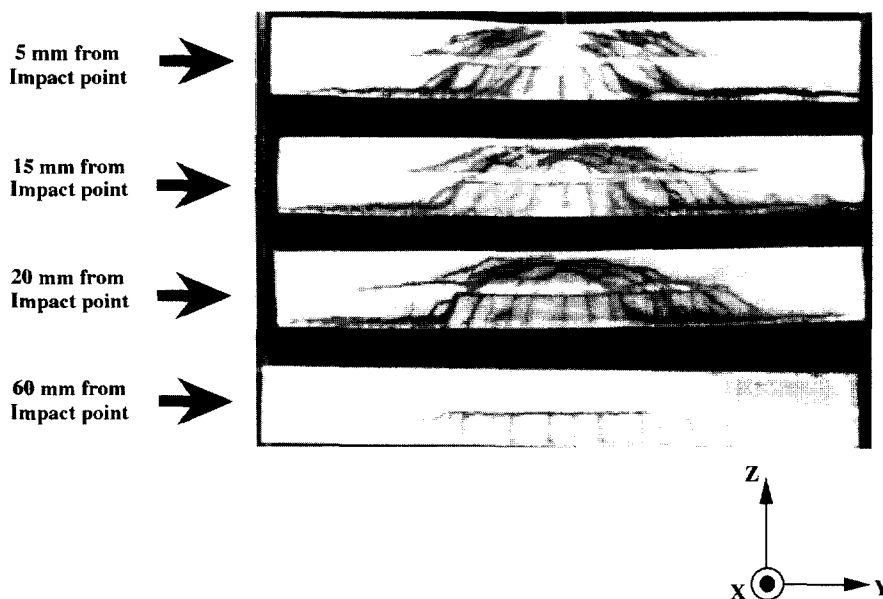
Visualization of the fissuration in transverse cross-sections, by using dye
